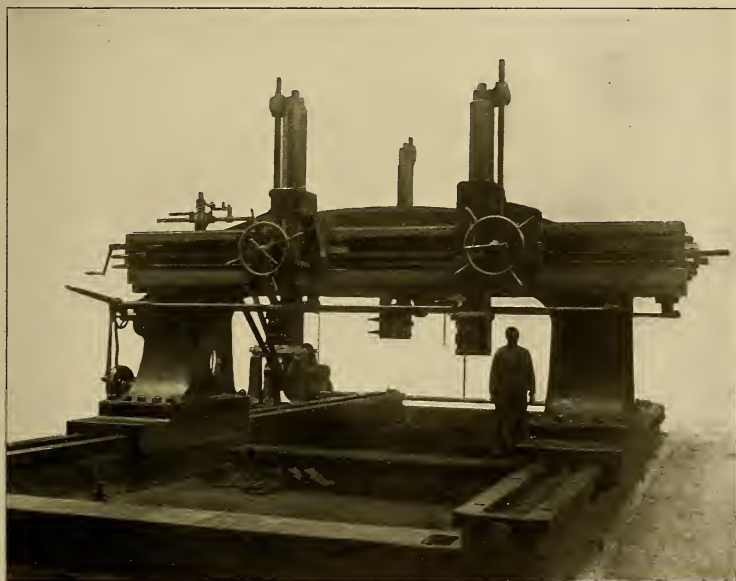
PLANING MACHINE WITH CROSS RAIL AND UPRIGHTS TRAVELLING ON SIDE WAYS. MADE BY M. M. SCULFORT & FOCKEDEV, MAUBEUGE, FRANCE
